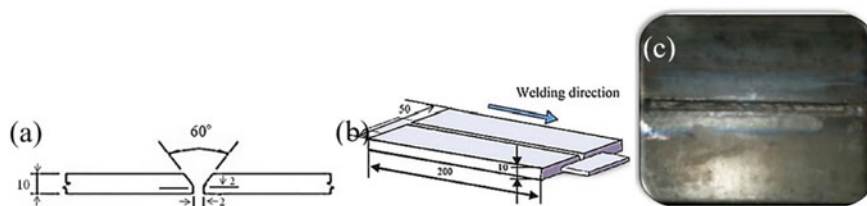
a, b A single sided V-groove butt type similar joint with narrow gap and indicating welding direction for Inconel 617 alloy, c TIG welded plate ($200 \times 50 \times 10 \text{ mm}^3$)
